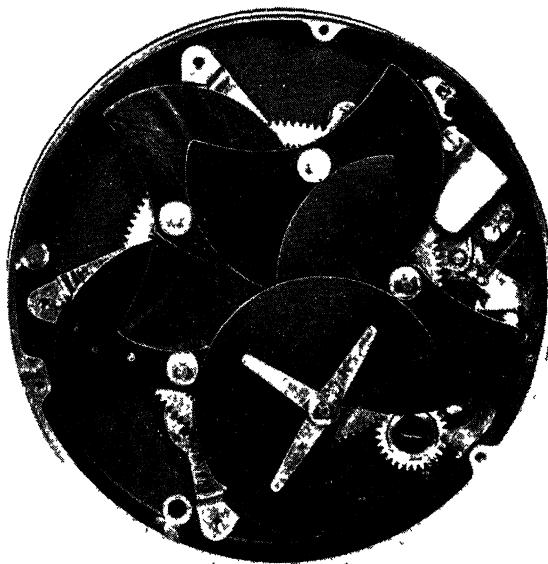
Experimental Rotary-type shutter showing arrangement of shutter blades and partly obscured driving ring gear.
